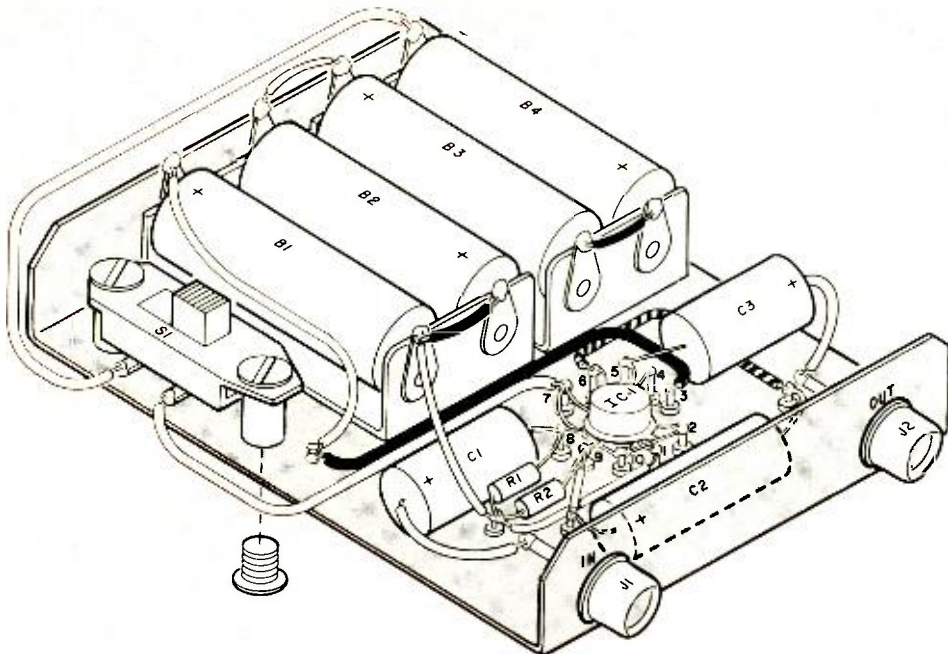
Pictorial of fully assembled integrated circuit shows simplicity of layout and wiring details. The 10 teflon terminals that mount the TO-5 case can be replaced with one Sealectro IC socket.
